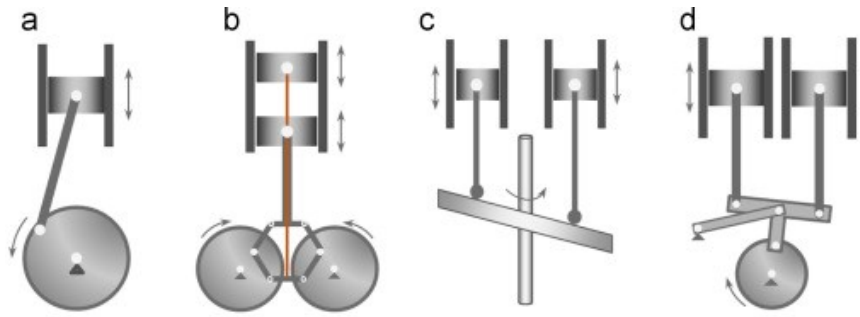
Kinetic drive mechanisms used for Stirling machines: (a) crank-slider drive; (b) rhombic drive; (c) swash-plate drive; and (d) Ross-yoke drive [126].
